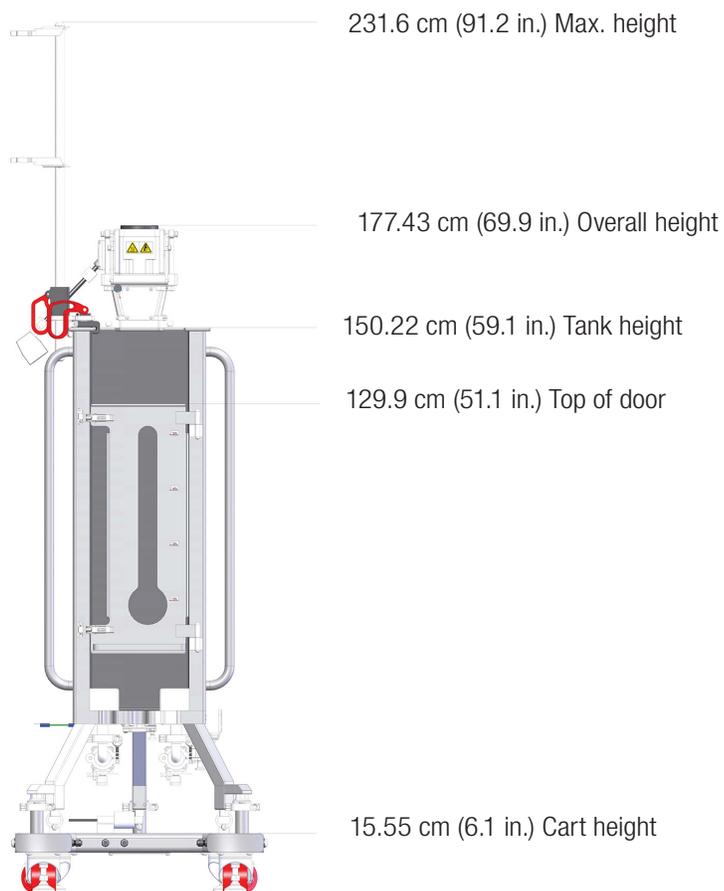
Dimensions of 50 L DynaDrive S.U.B. without optional E-Box (front view).
